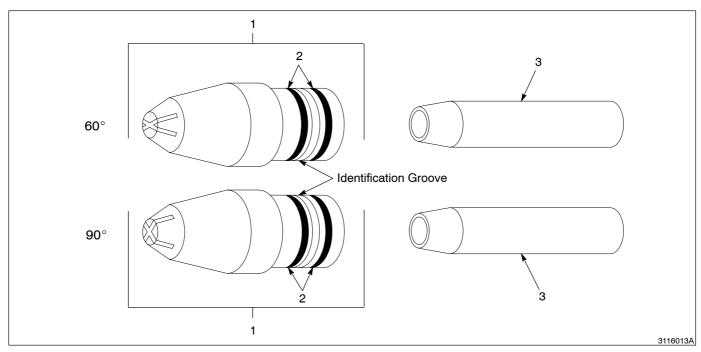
Optional Cross-Cut Nozzle Service Kits
